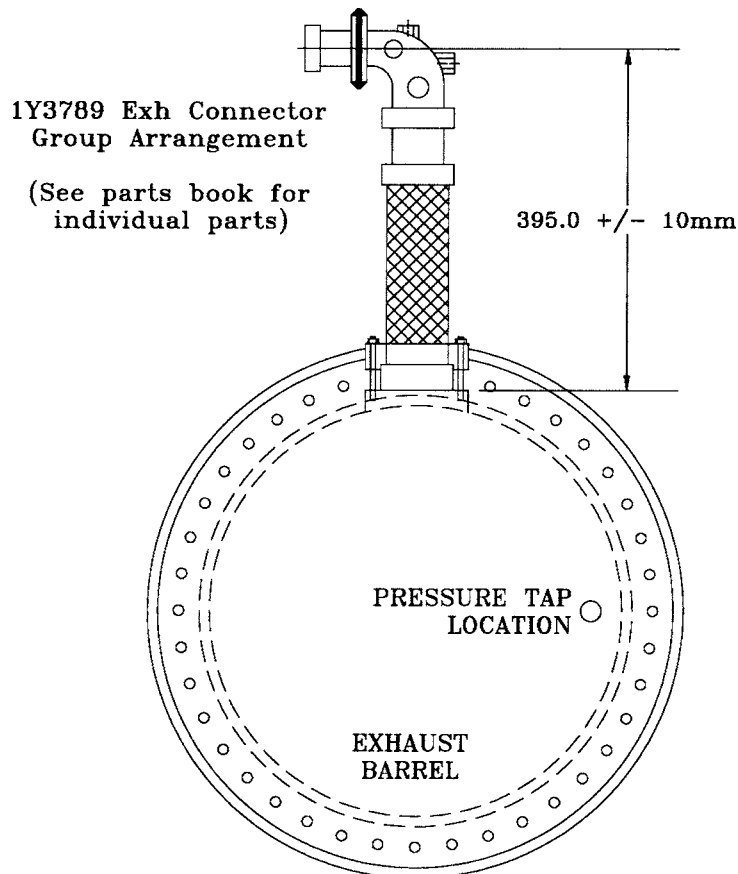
1Y3978 Exhaust Barrel and Piping
